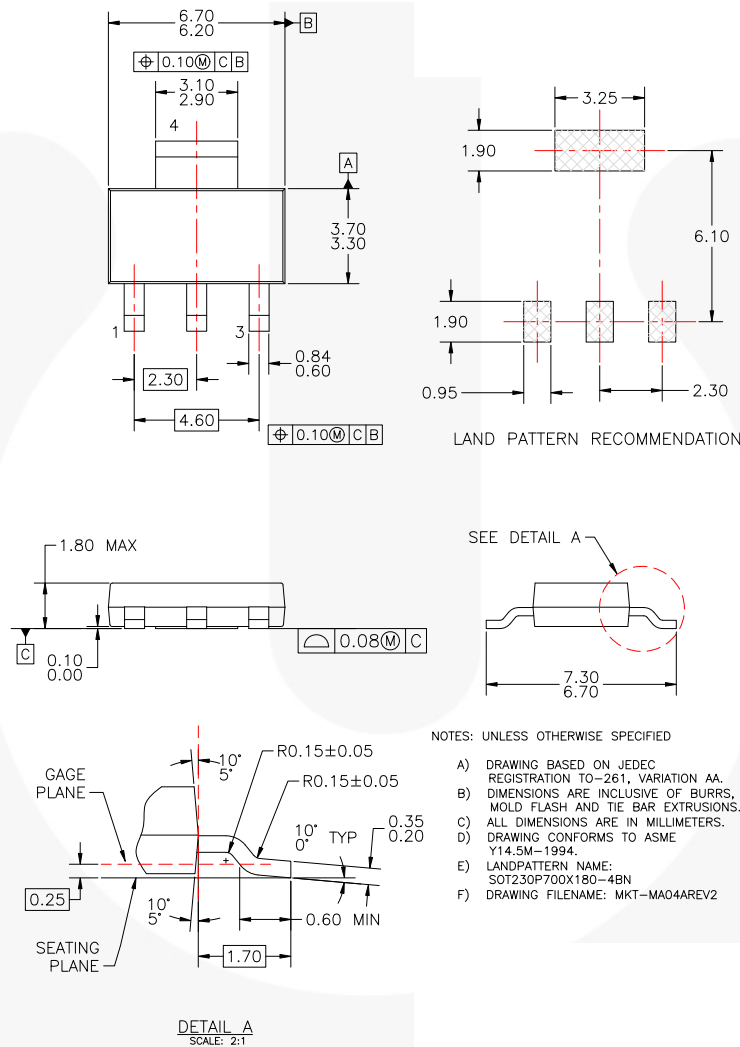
MOLDED PACKAGING, SOT-223, 4-LEAD (ACTIVE)
